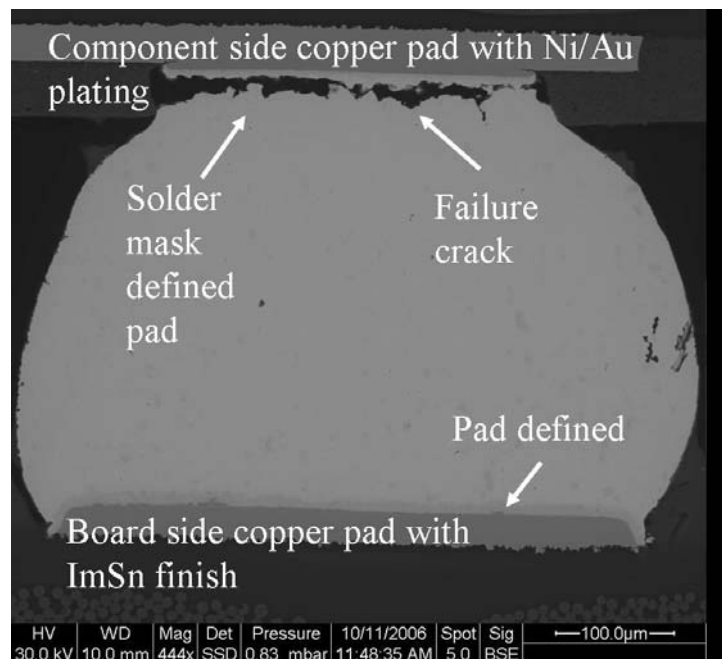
Crack location for lead-free solder joint after thermal cycling.
